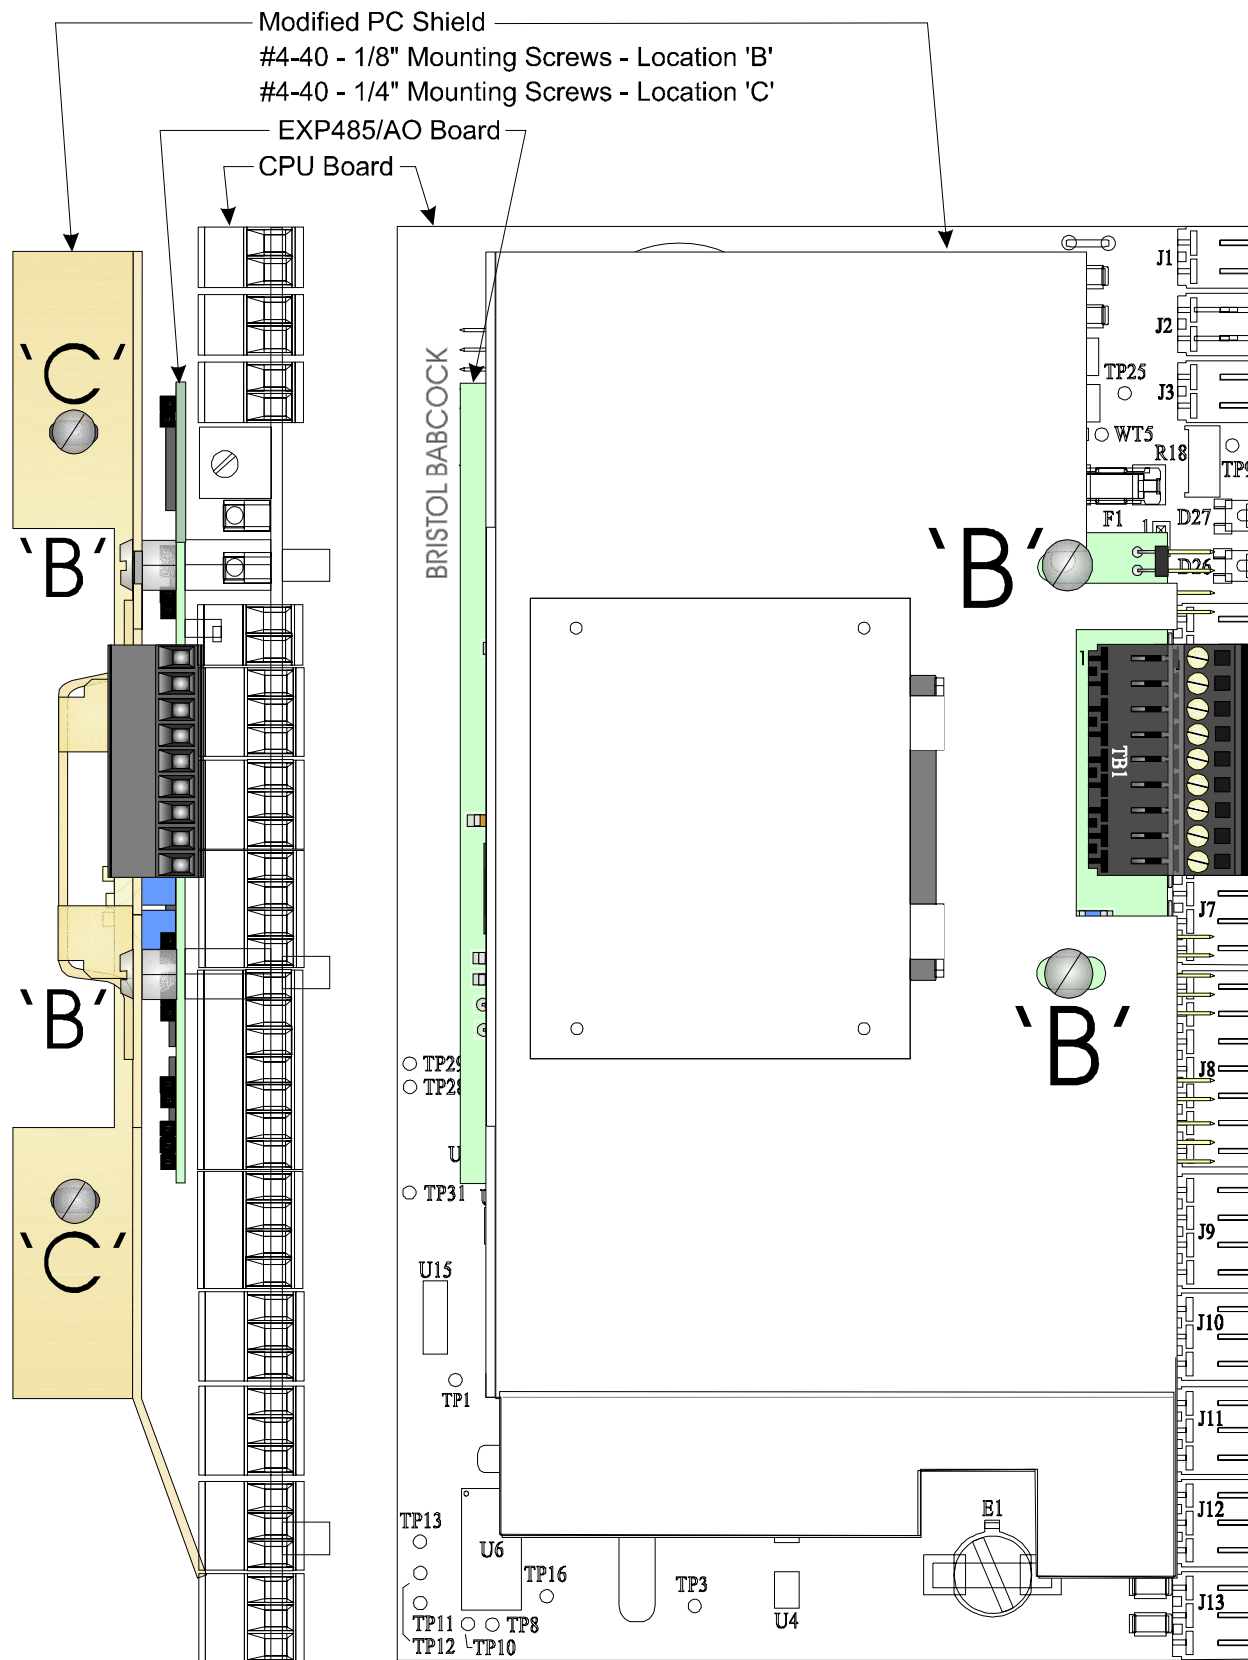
TeleRTU CPU Board - Installation Drawing #1
